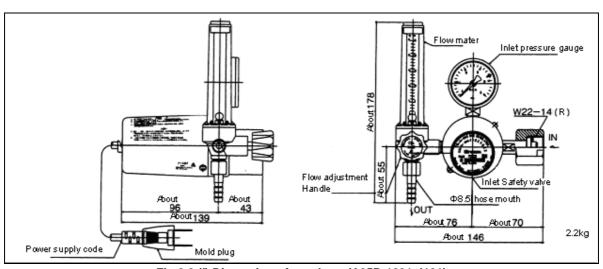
(j) Dimension of regulator (A05B-1291-J101)
